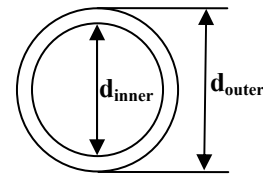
Cross section of a plastic tube before deformation showing inner and outer diameter.
